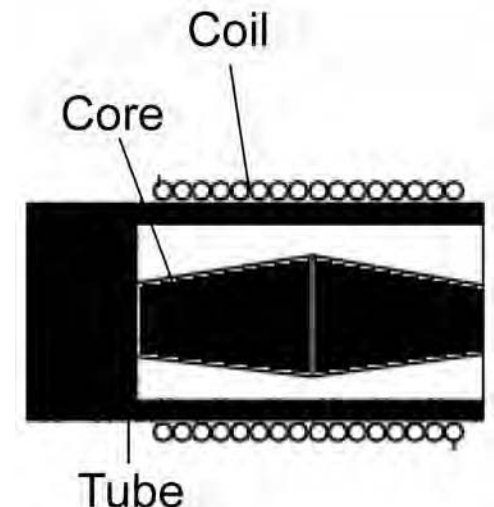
Cross section of tubes with coil and core for magnetic impulse welding
